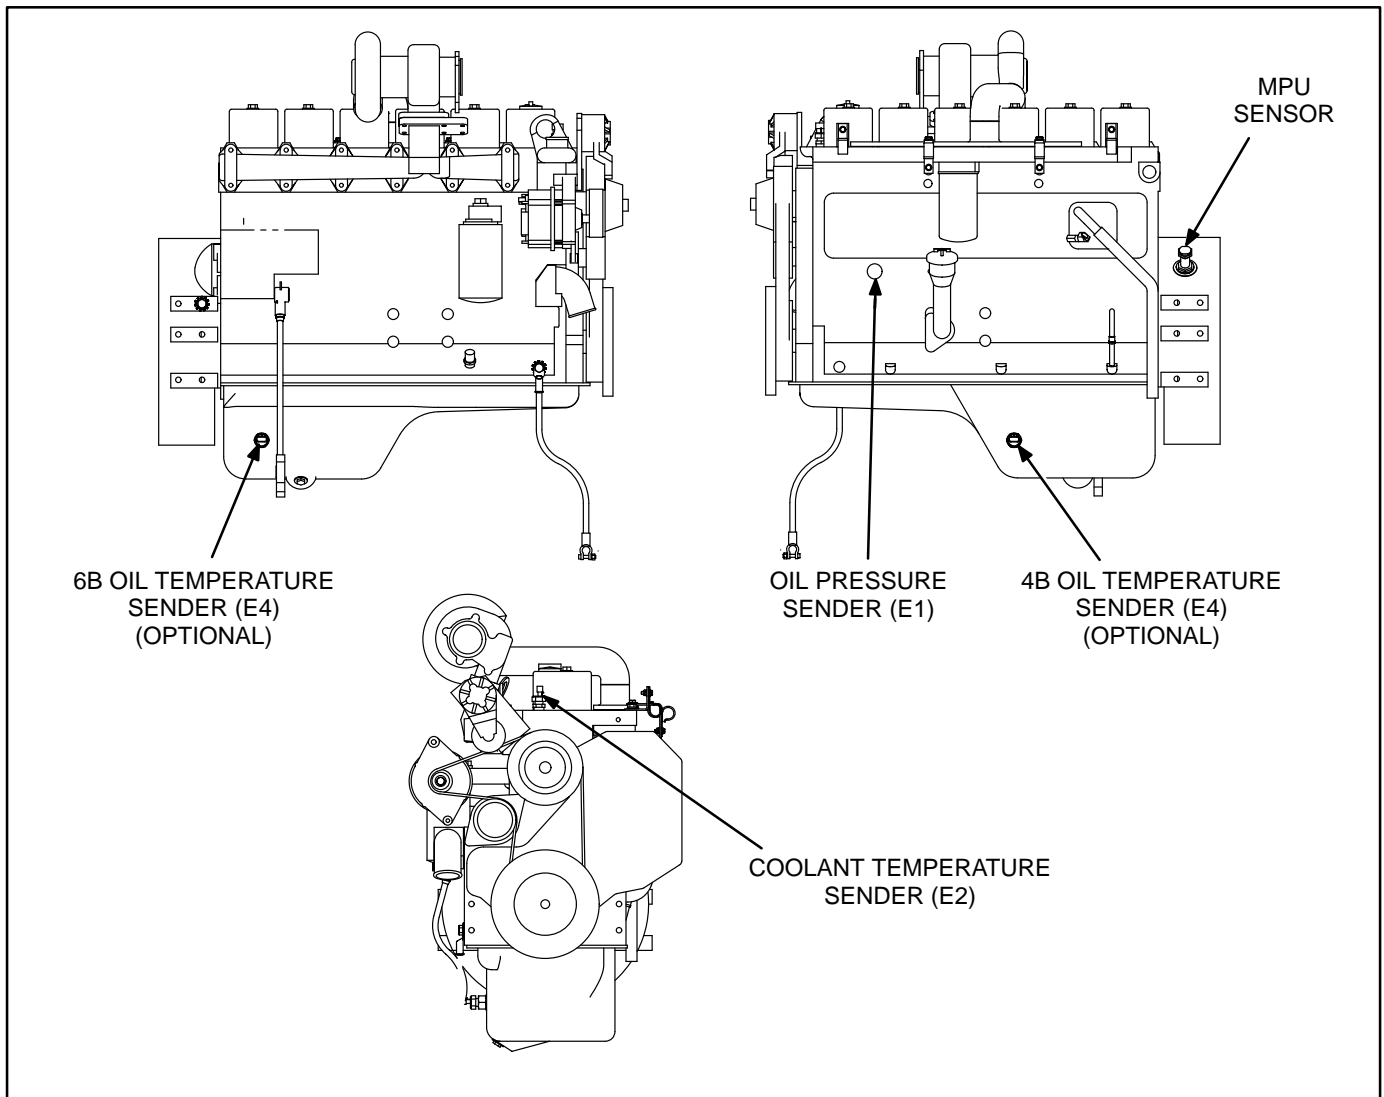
ENGINE SENSOR LOCATIONS (4B/6B SERIES ENGINES)
